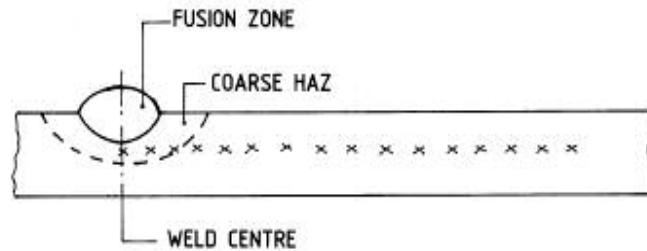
Schematic of the hardness readings across the fusion zone of the weld coupon cross section, HAZ and base metal [13]
